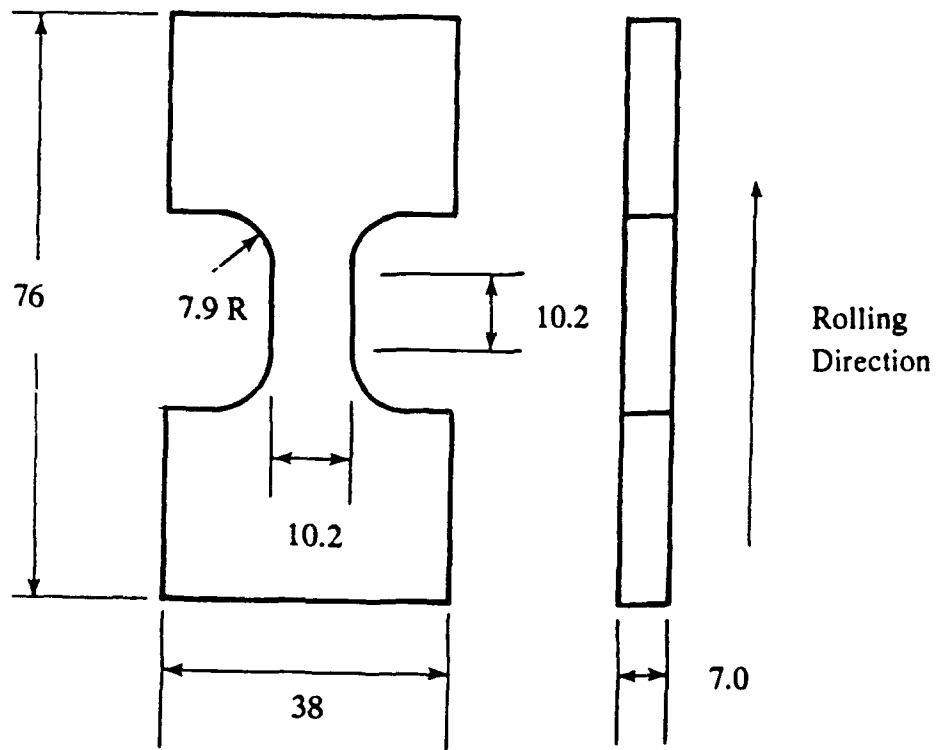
Dimensions of fatigue specimens used. All dimensions in mm.
